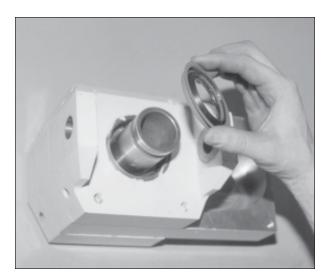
Install grease seal in bottom plate around lower portion of hex drive gear.
